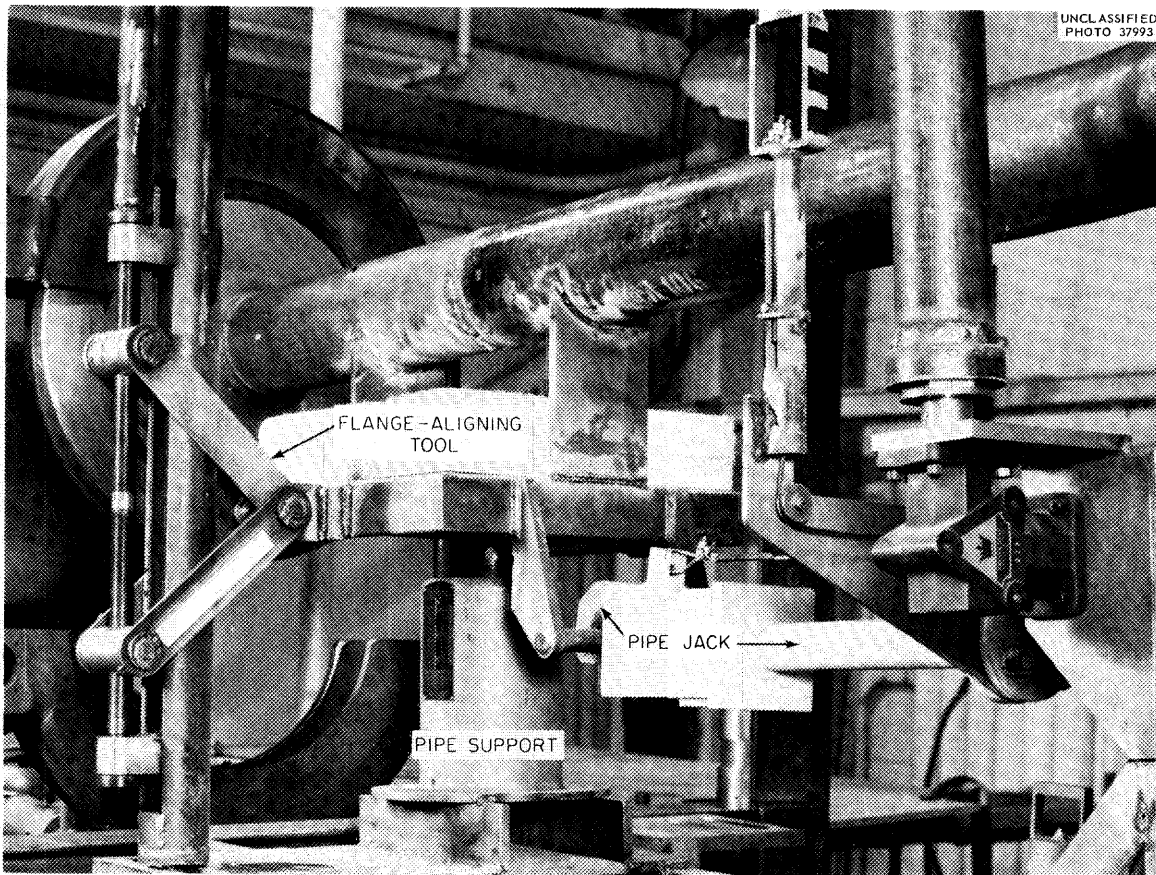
Flange Alignment and Pipe-Jacking Tool.
